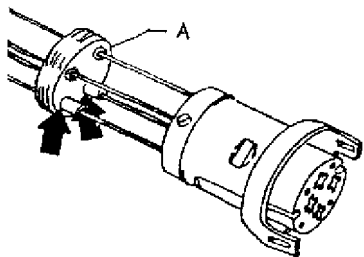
Connector Housing Sealing Gasket & Rubber Tubes
